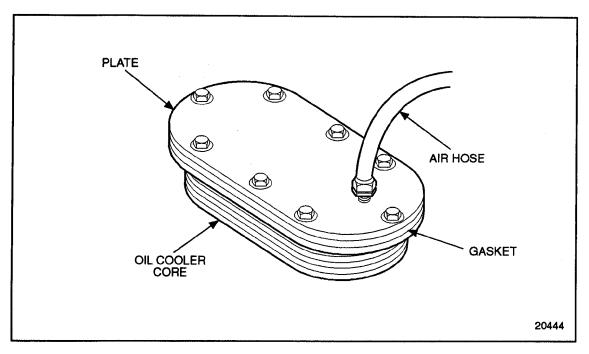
Preparing Oil Cooler Core for Pressure Test
